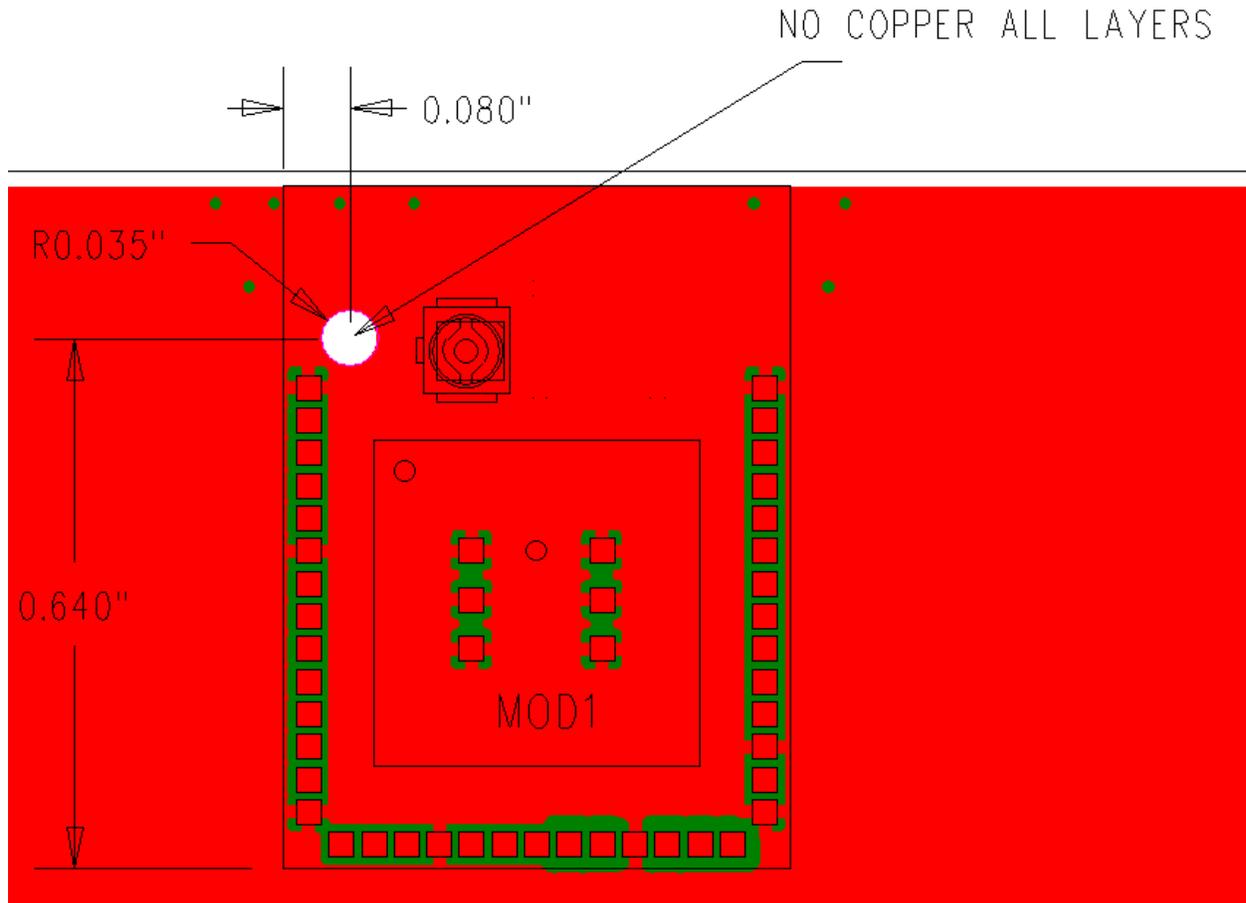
Host PCB for Sterling-LWB U.FL Module Variant
